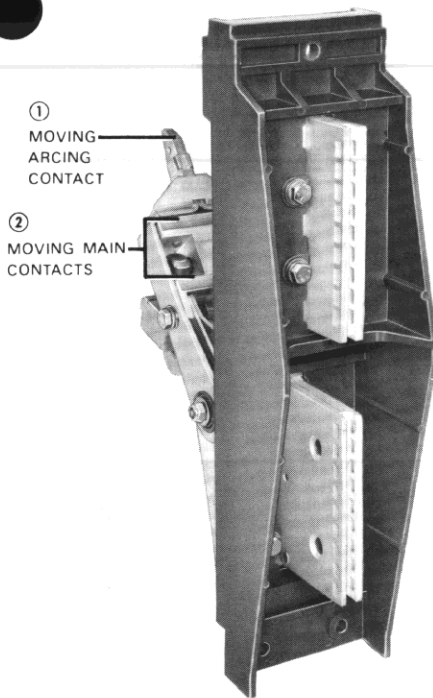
Type DS-632 Pole Unit Assembly—Rear View
